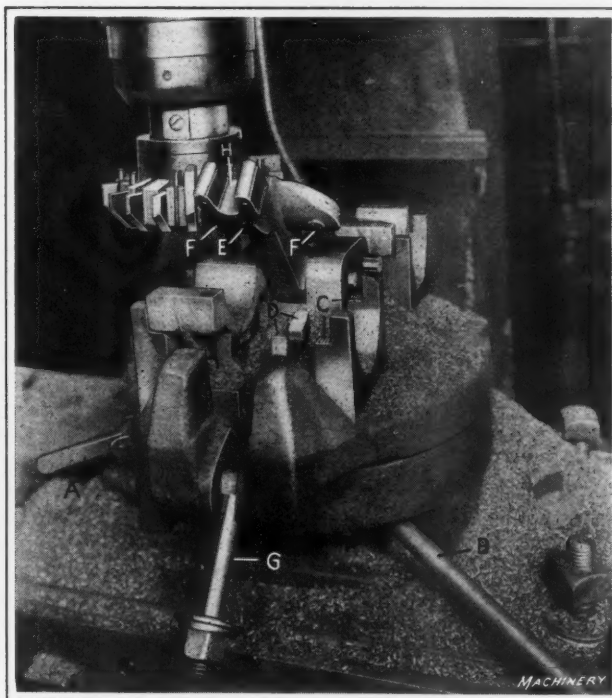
Vertical Milling Machine equipped with a Special Indexing Fixture for a Similar Job to the One shown in Fig. 5
